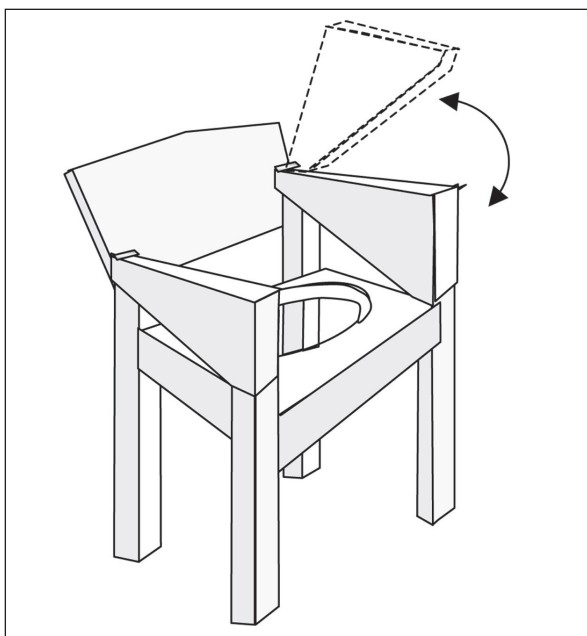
Chair with hinged side-rails that can be raised out of the way.
